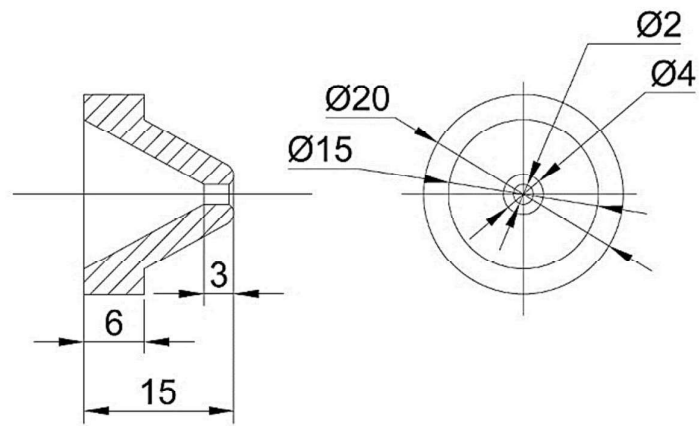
Extruder nozzle (all dimensions are in mm).
